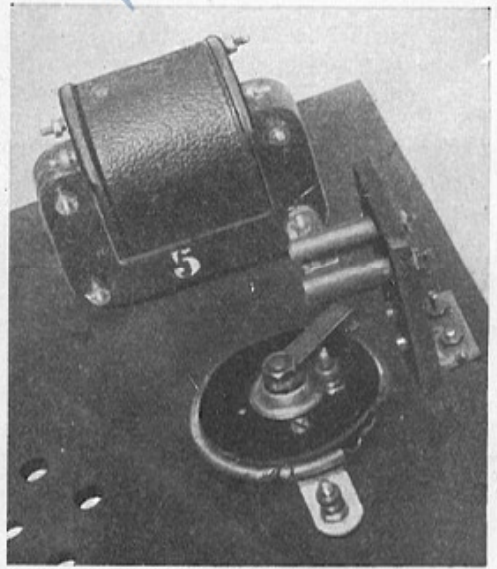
Showing position of Valve Holder, L.F. Transformer, and Rheostat.
